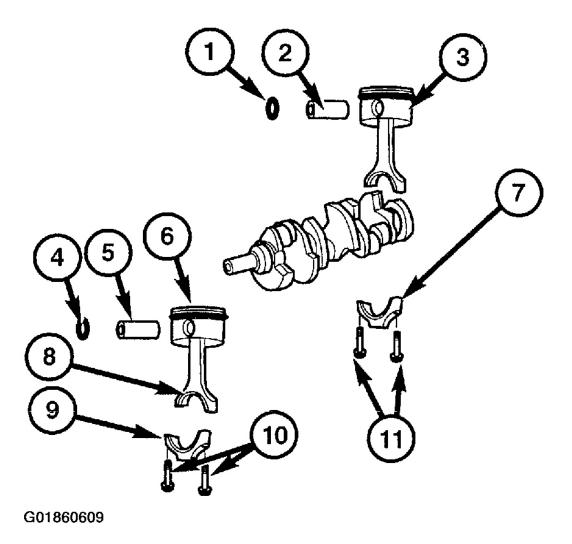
Identifying Piston & Connecting Rod Components Courtesy of DAIMLERCHRYSLER CORP.
